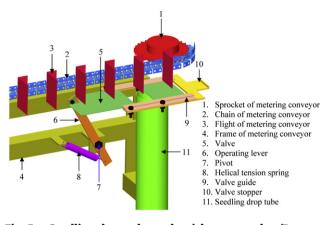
Seedling drop tube and quick return valve (Base plate of metering conveyor has been removed).
